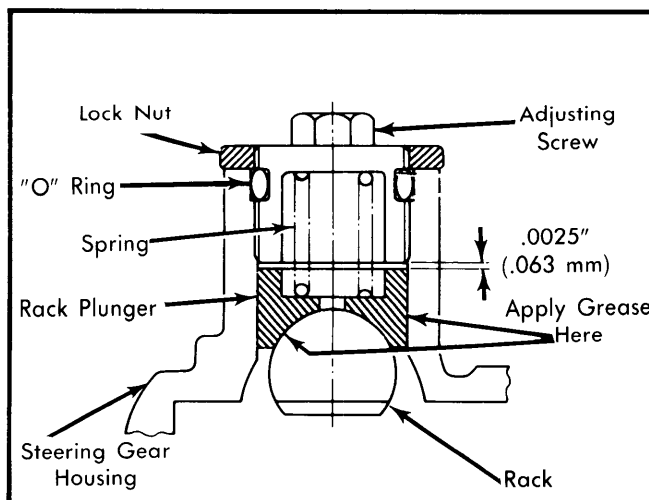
Cross Sectional View of Pinion Gear and Rack Showing Lubrication Points and Backlash Adjustment
